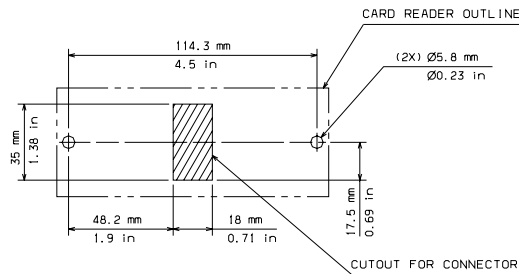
Bar code/magnetic badge slot reader mounting template
